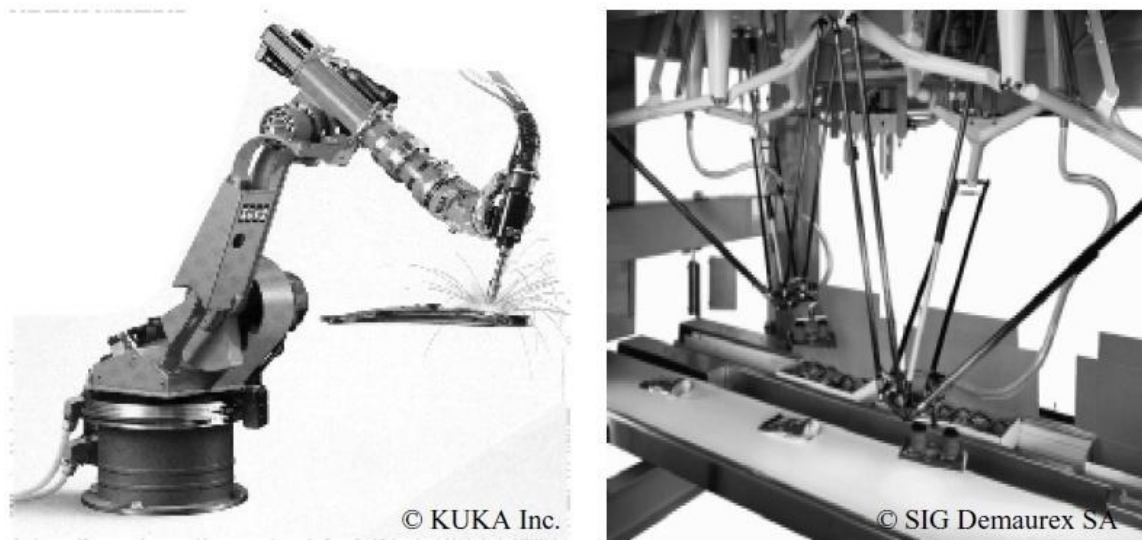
View of welding robot and parallel with robot of packaging chocolates
